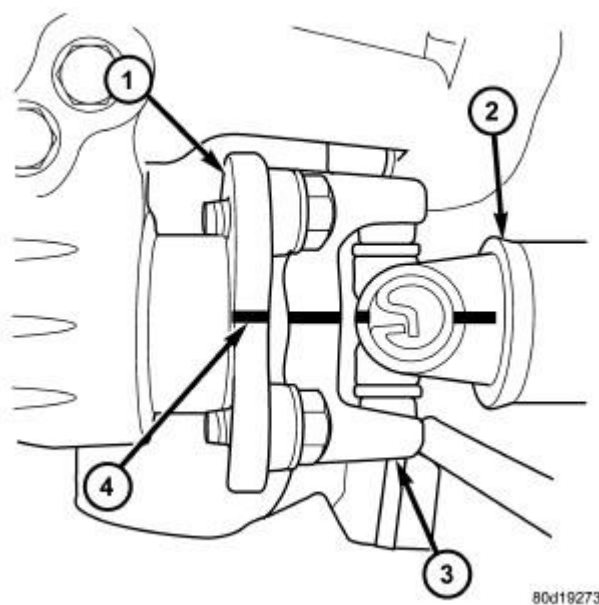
Propeller Shaft & Pinion Flange. Reference Mark
